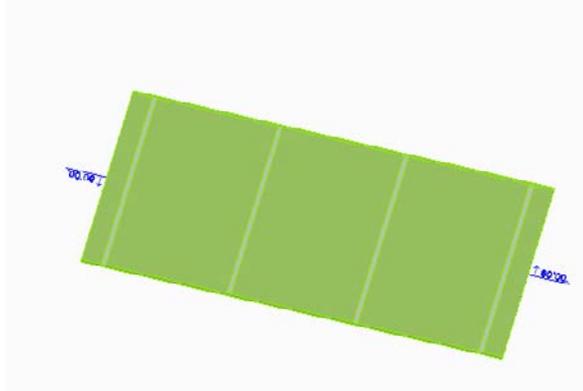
b) CAD of compressor cover plate converted to sheet metal and unbent
